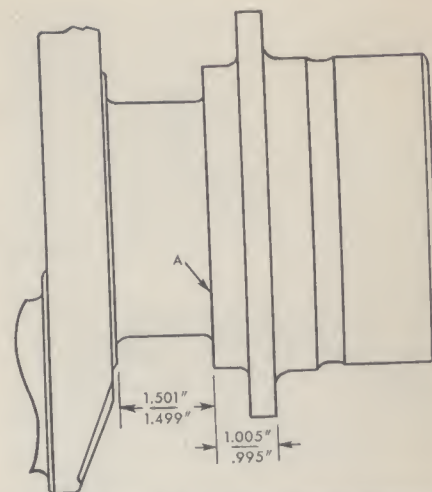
B—A GM engine showing standard dimensions of the crankshaft rear main journal thrust surfaces for the use of standard thickness thrust washers.
